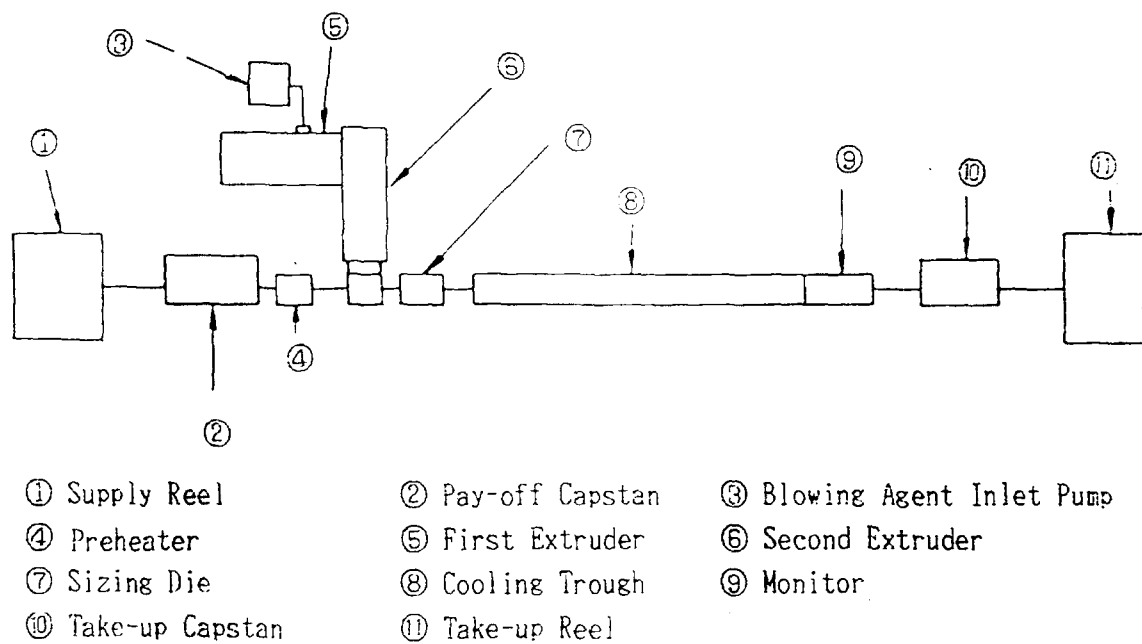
Extrusion Line for Coaxial Cable Core with Highly Expanded Insulation
